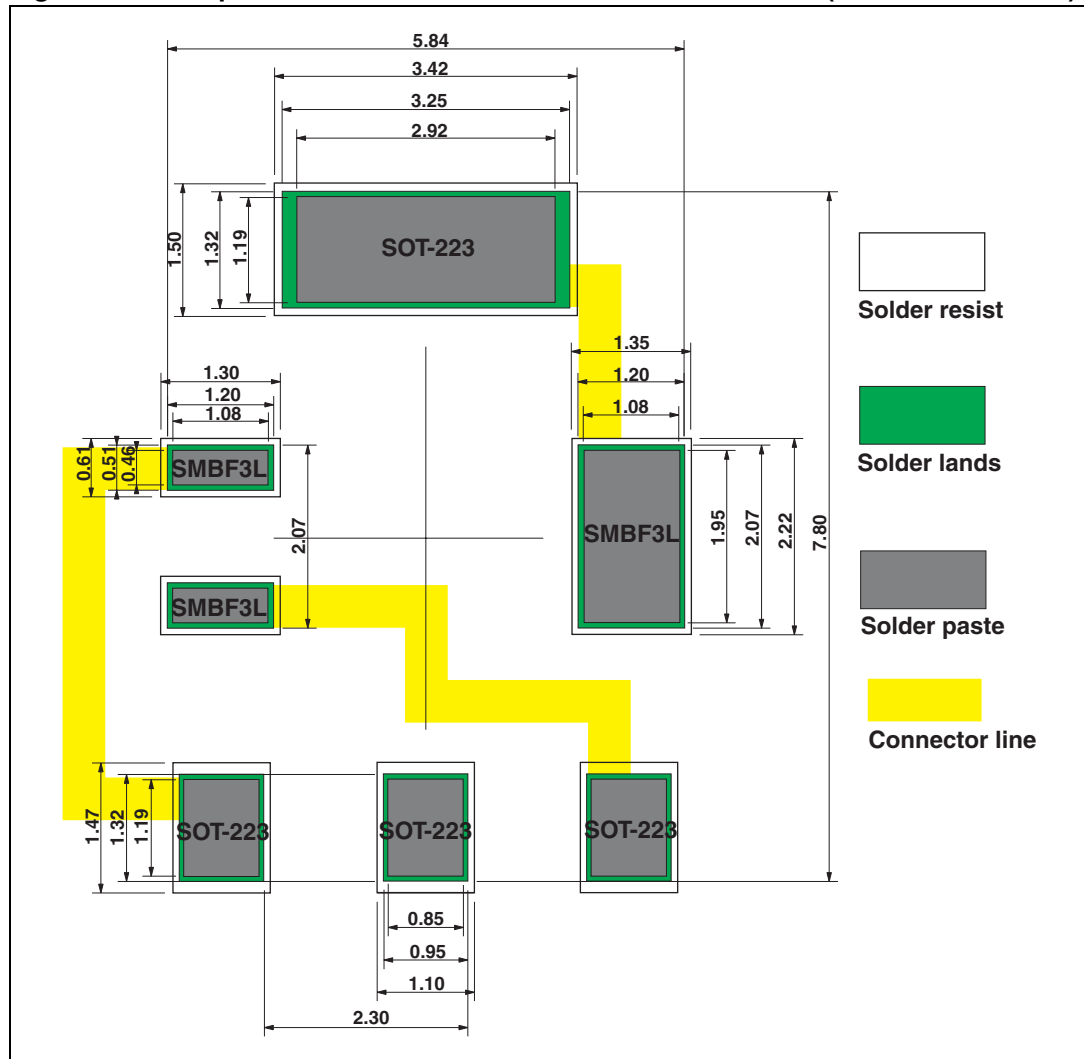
Footprint and connectors for SOT-223 or SMBflat-3L (dimensions in mm)
